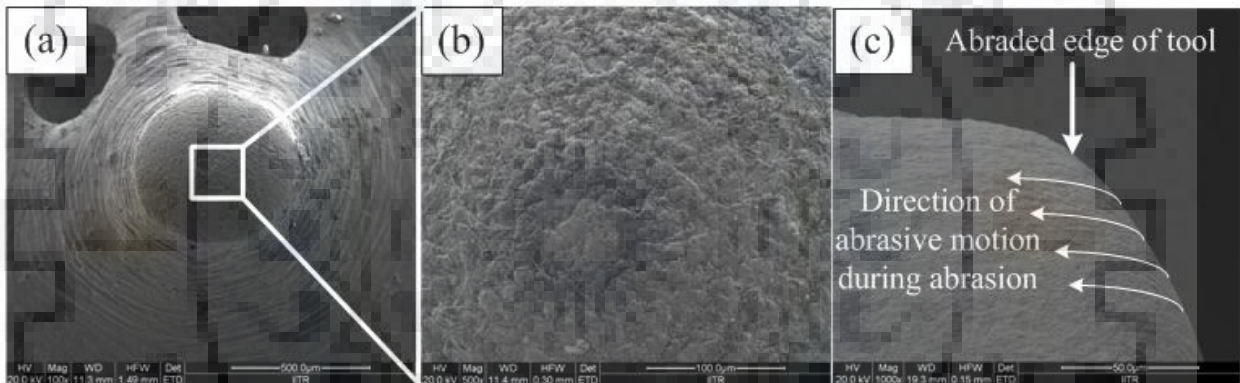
FESEM image of worn out tool showing (a) machined face of tool (b) magnified view of machined face of tool (c) abraded edge of tool
